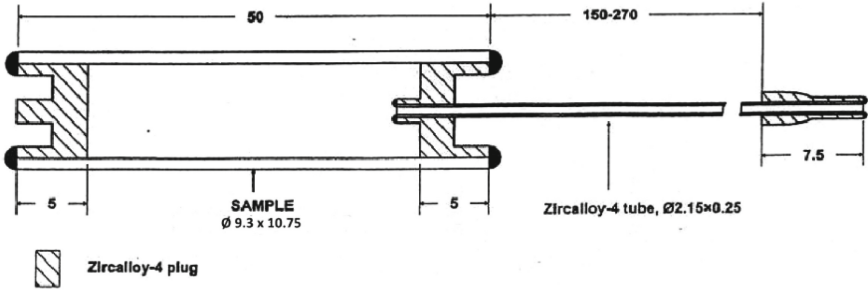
Drawing of the PUZRY Zr-4 clad tube ballooning and burst tests.
